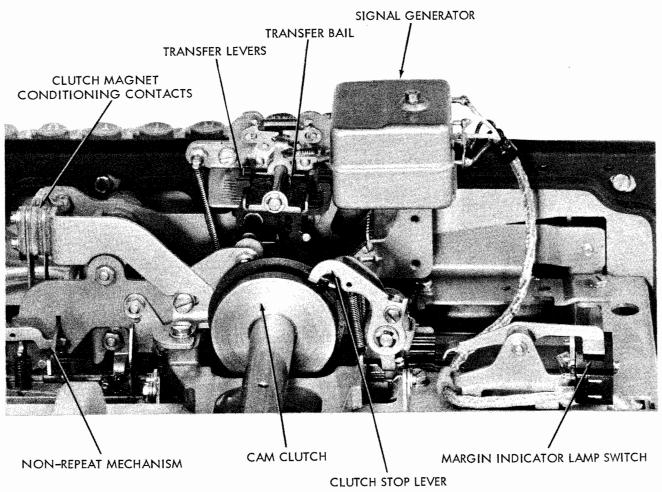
A. KEYBOARD SIGNAL GENERATOR (REAR VIEW)
